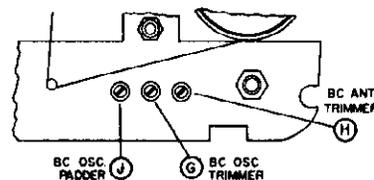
Front View of Chassis Showing Location of Alignment Adjustments 92B1588-A
